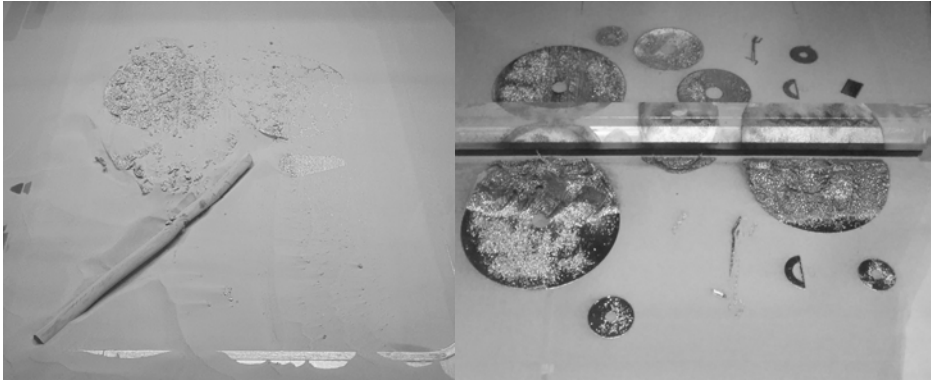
Mechanical failures of a build process. Left: degraded and pulled out wiper silicon; Right: blocked recoating mechanism from warped parts.
